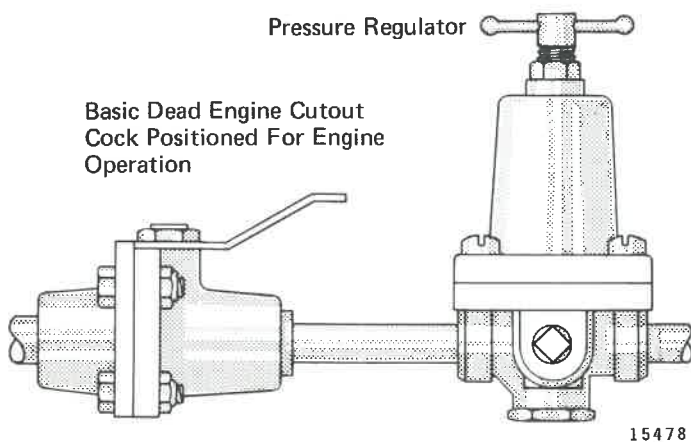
Dead Engine Cutout Cock And Pressure Regulator
